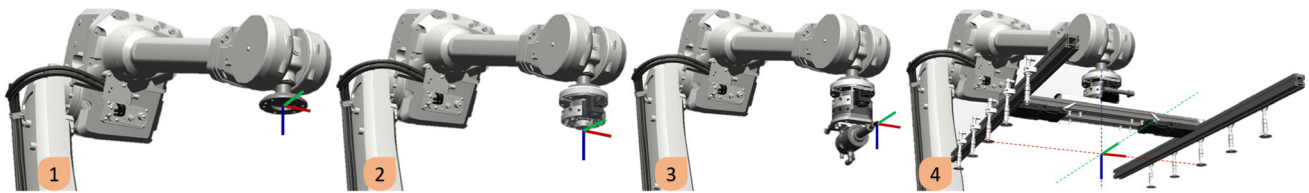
Tool Center Points: 1 - robot tool mounting point. 2 - QC-41 master plate mounting point. 3 - deburring ATI RC300 tool. 4 - vacuum gripper point
